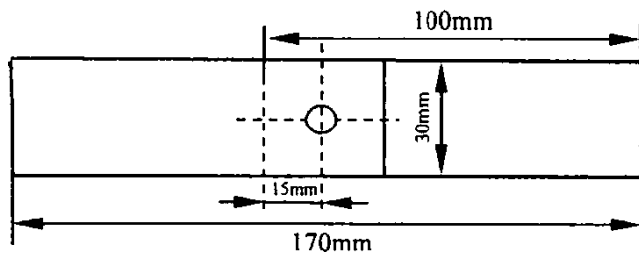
The sizes of resistance spot-welded test specimens
